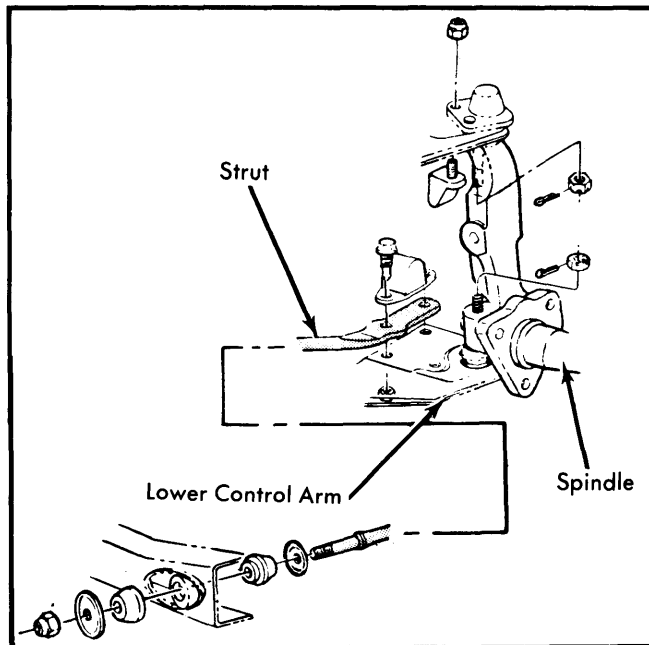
Exploded View of Ford and Mercury Strut and Bushing Assembly
